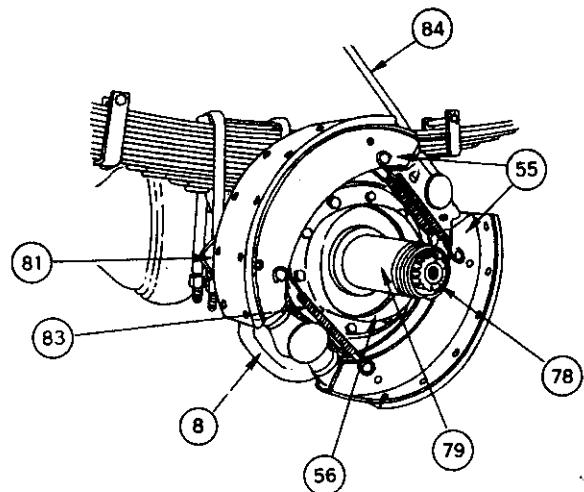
RIGHT HAND FRONT WHEEL (HUB REMOVED)
